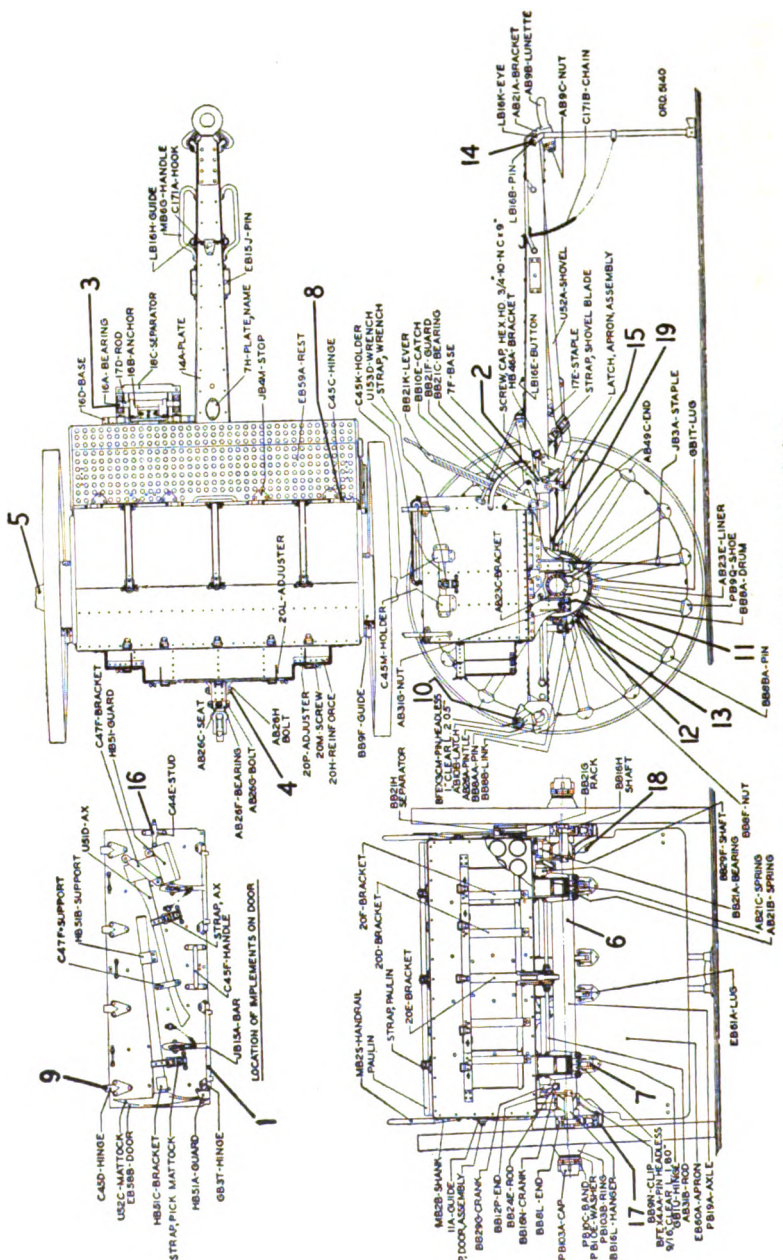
75-mm gun caisson, M1918, assembled views
